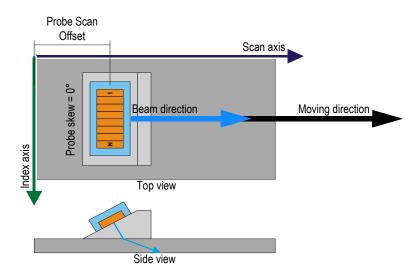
Rivet inspection with 0° probe skew
